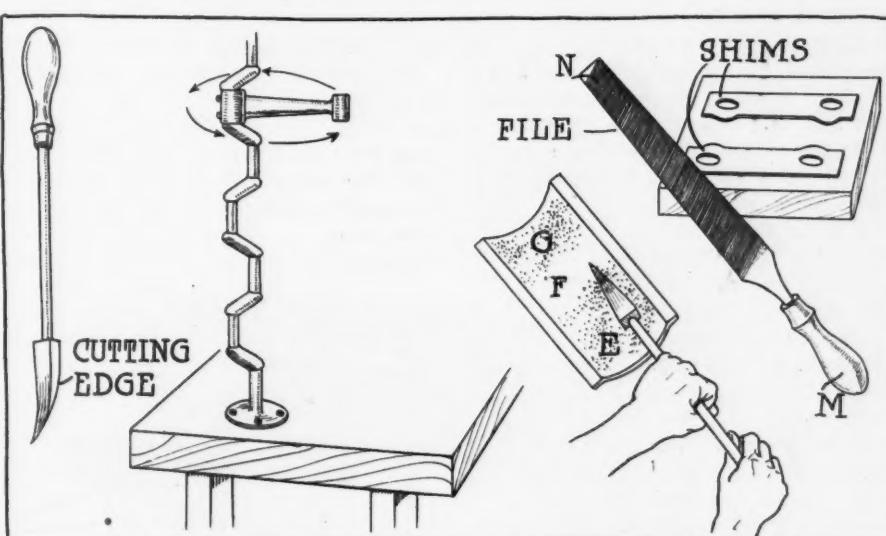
ONE METHOD OF SCRAPING BEARINGS
